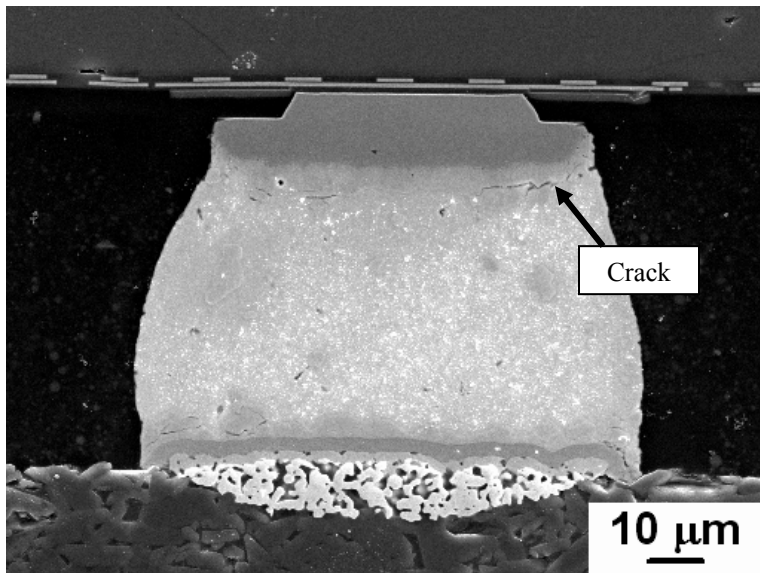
Solder fatigue cracking at 2500 cycles
